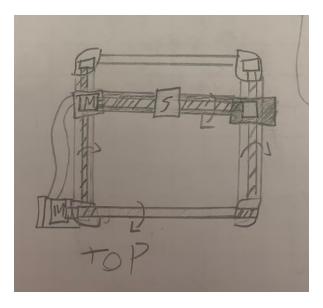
Top view of Candidate 3 depicting the motion on the X and Y planes through lead screw mechanisms and a hidden worm gear mechanism.
